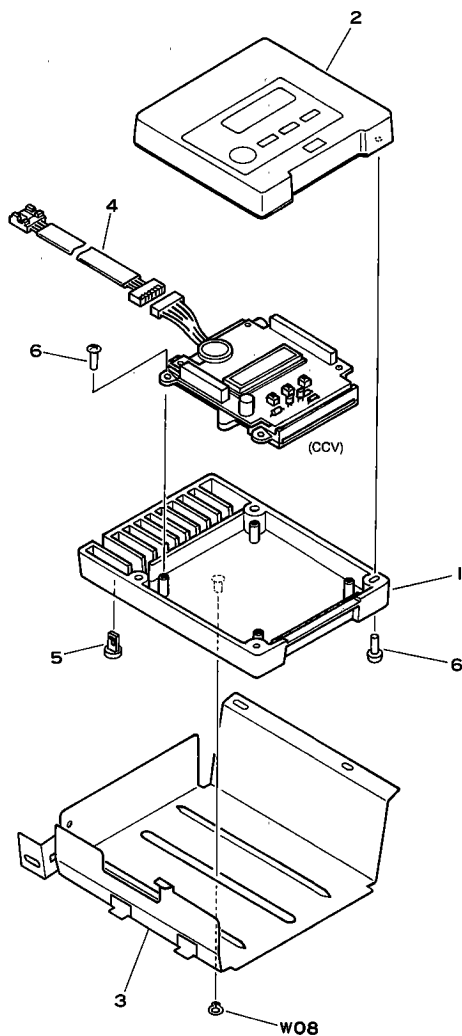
RF CONTROLLER P.C.B. ASSEMBLY
